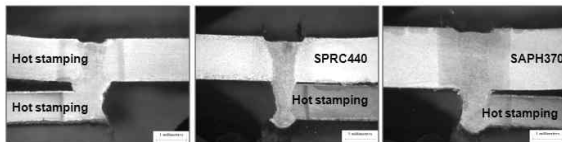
Fracture location of various material combination with hot stamping steels
